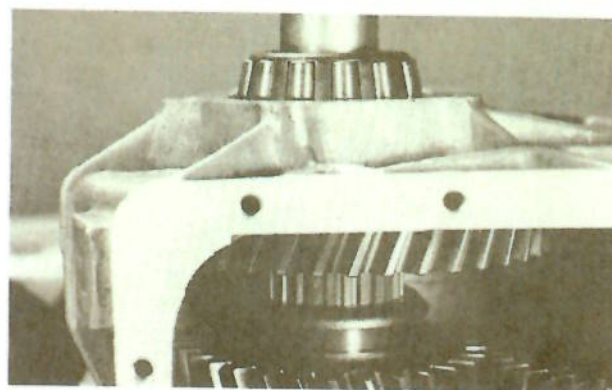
INSTALLING THE CONE OF REAR TAPERED ROLLER BEARING ON THE OVERDRIVE INPUT SHAFT.
